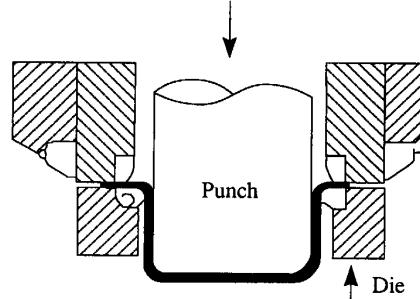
Schematic drawing of cylindrical shell draw tester.
